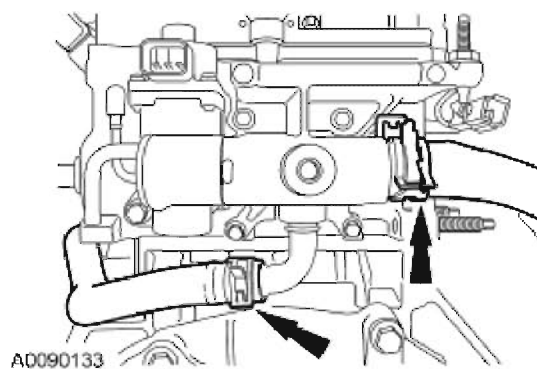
Locating Coolant Hose (1 Of 3)
